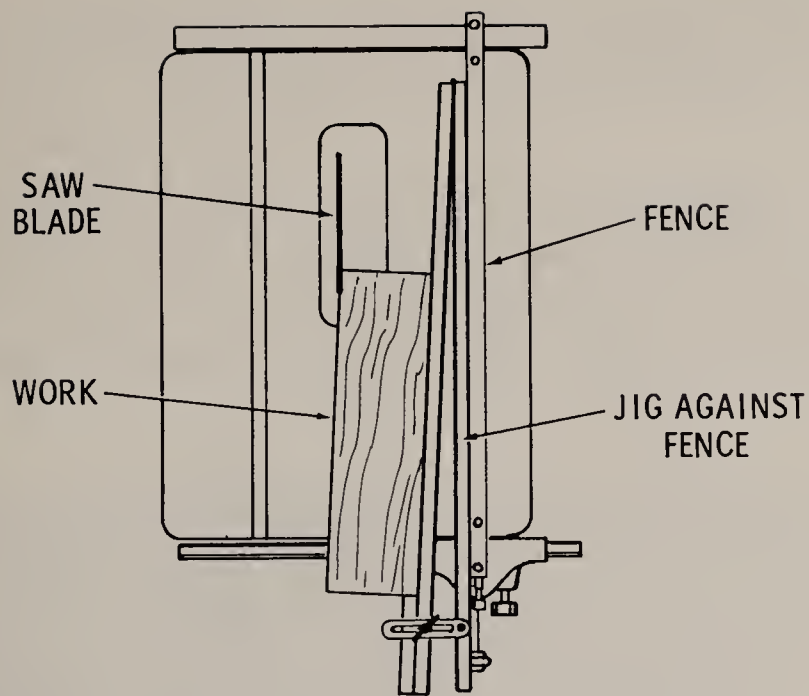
Method of cutting taper on stock by means of tapering jig.
